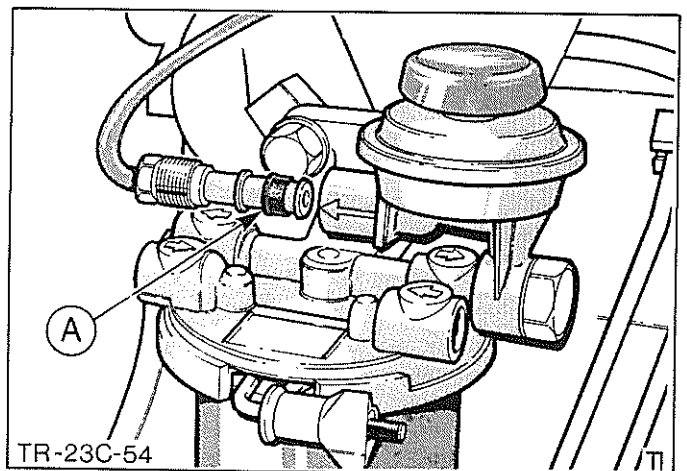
Locate fuel pump assembly to fuel filter and prime pump by depressing plunger.
